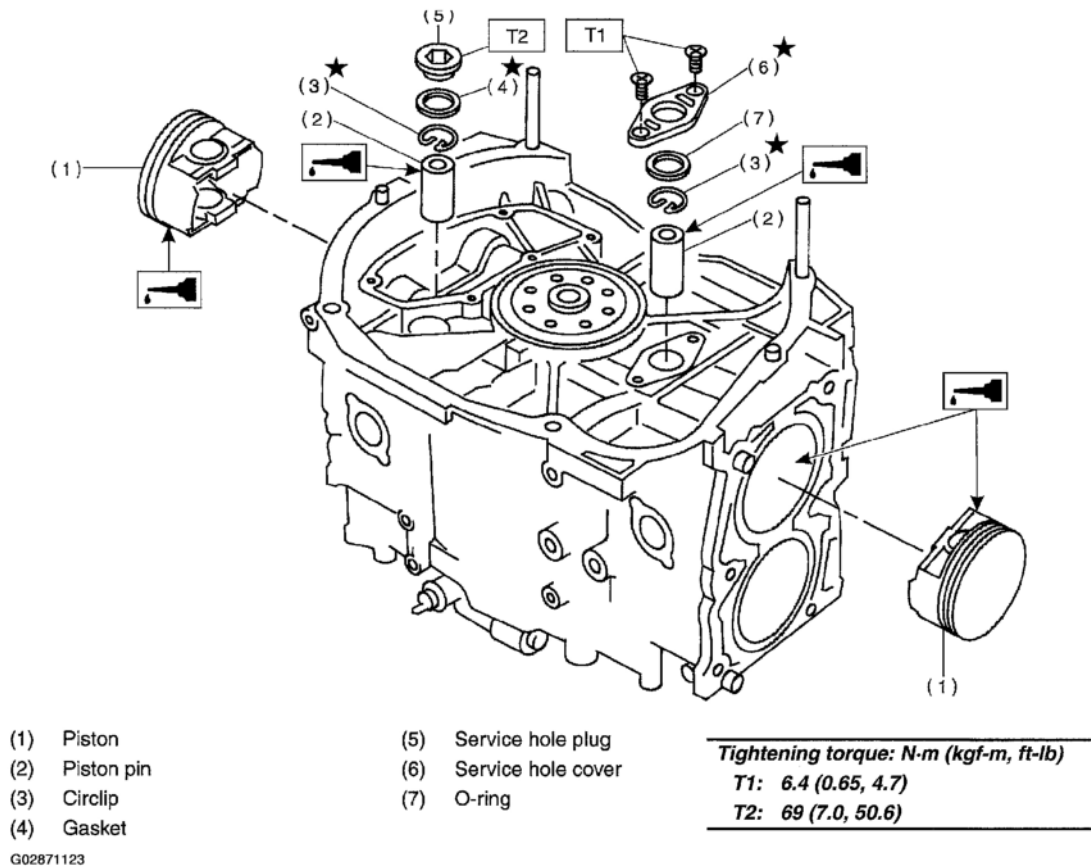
Identifying Lubricating Points Of Pistons And Piston Pins
